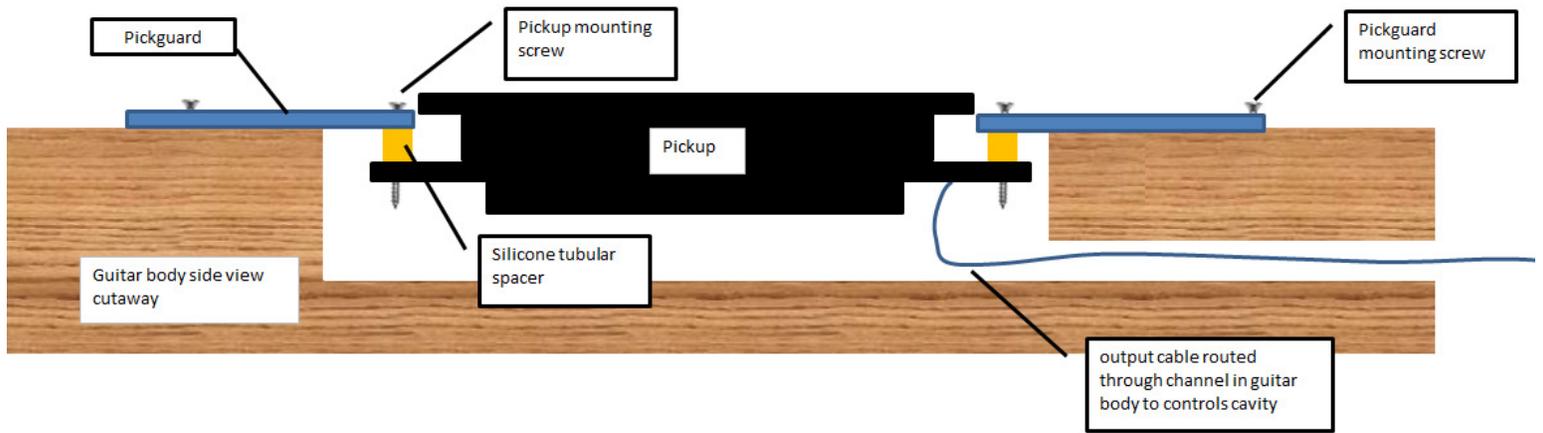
Cross section illustration of a pickup mounted to a pickguard.
